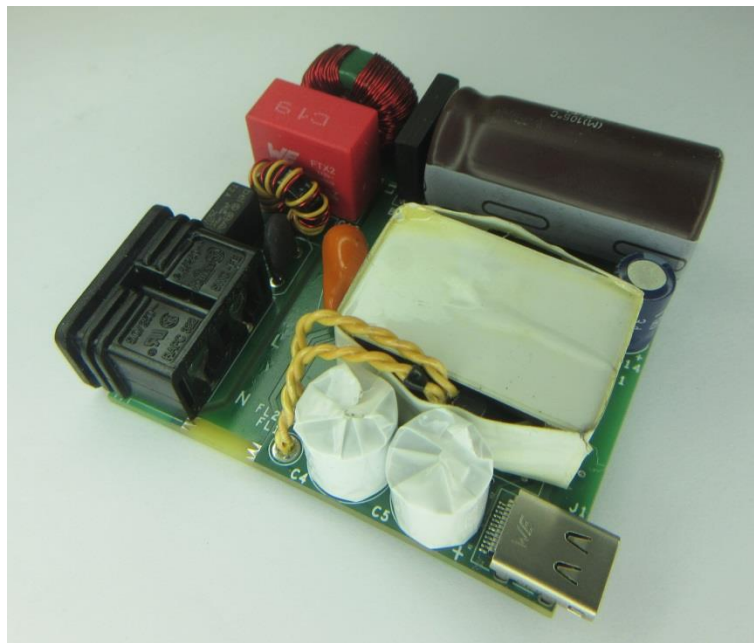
Populated Circuit Board Photograph, Entire Assembly.
